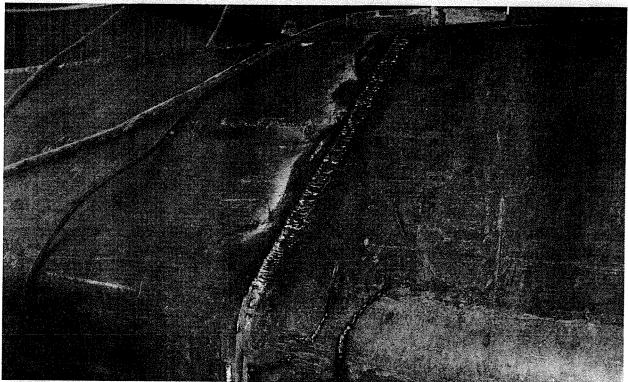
The two halves of the steel vessel are joined along a common seam with multiple passes of welding rod.
